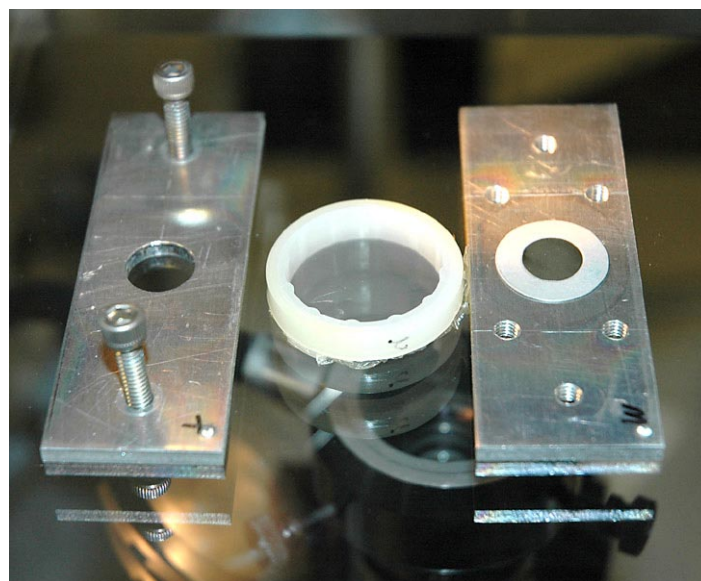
Photograph of physical fixture diagrammed in figure 1.
